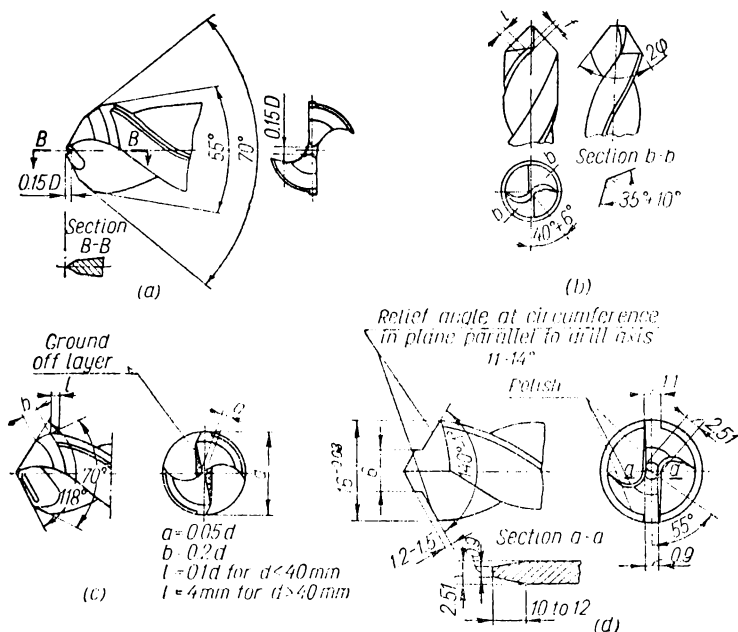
Methods of sharpening drills developed by drilling-machine operators:
